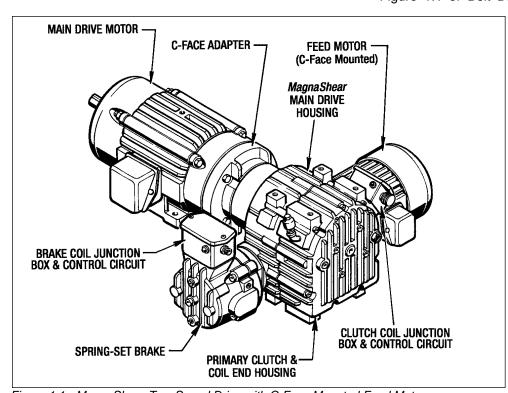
MagnaShear Two Speed Drive with C-Face Mounted Feed Motor
